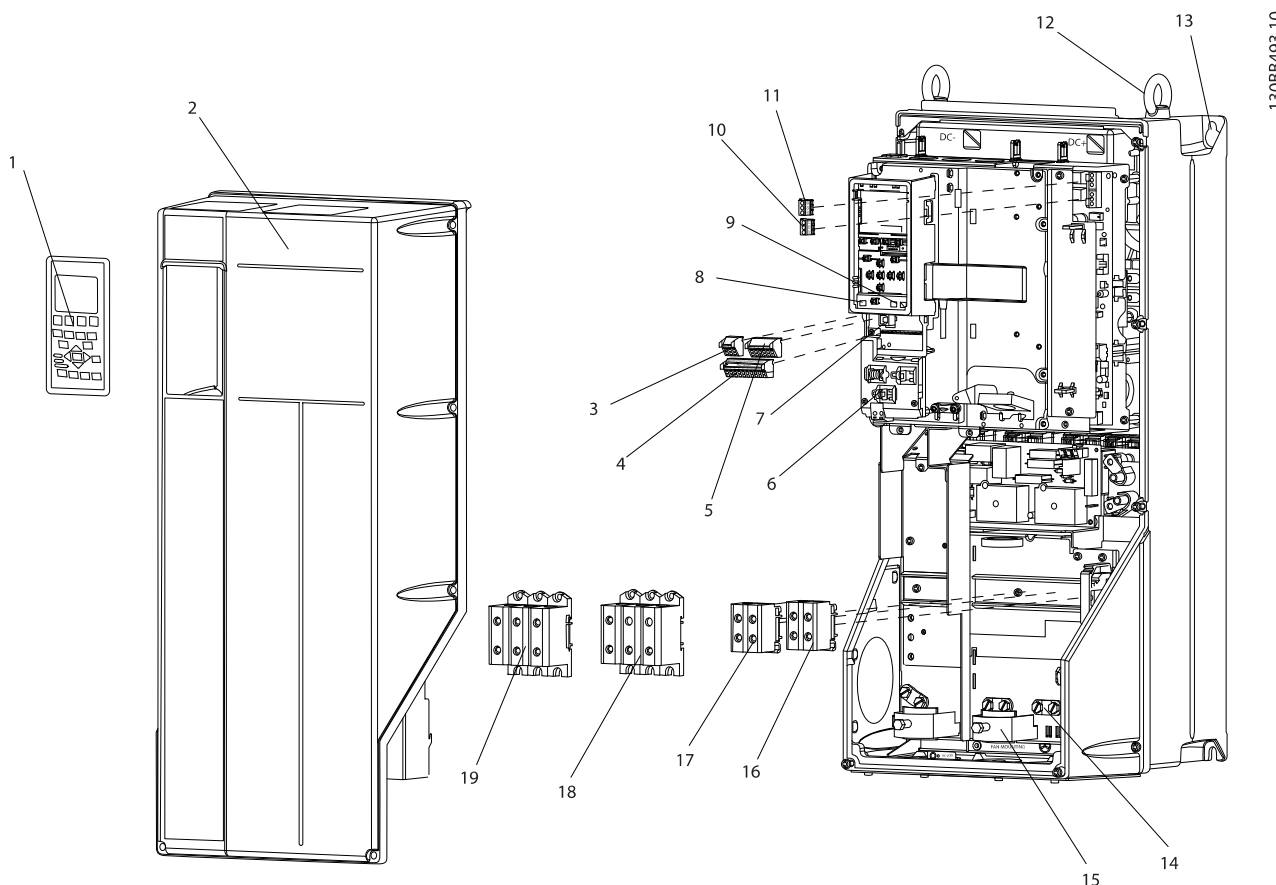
Exploded View Unit Sizes 12-13, IP20
